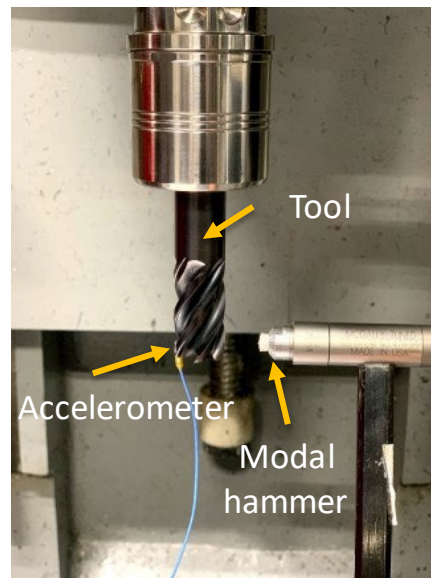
The tool tip FRF can be measured by impact testing using a modal hammer and accelerometer.
